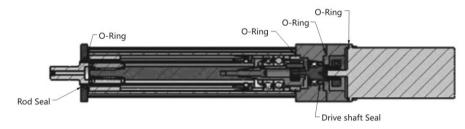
IP65 Gear set/Integrated Motor Mount Unit Sealing Details
